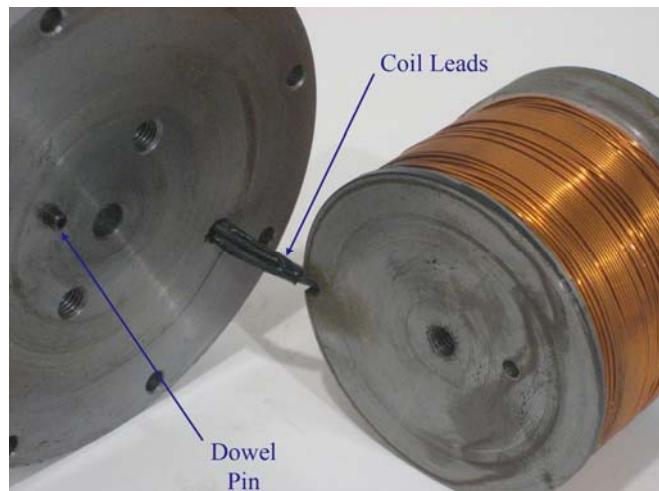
Mating surface between the Magnet Core and Bottom Plate (photo by Ryan Cavey)
